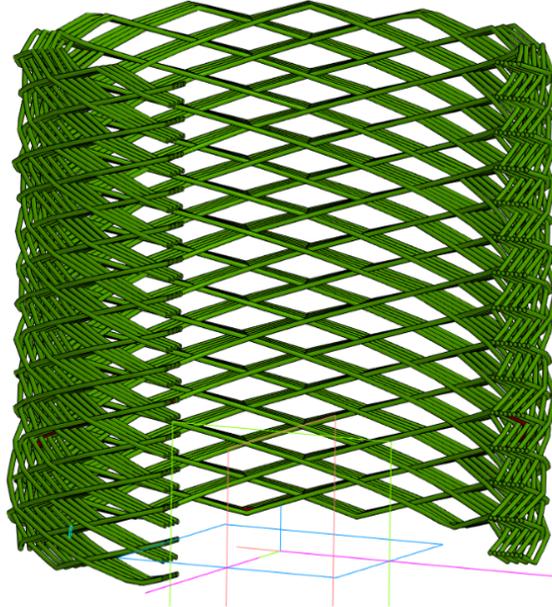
Computer model of thread winding with a honeycomb structure, gear ratio $u = \frac{11}{5}$
